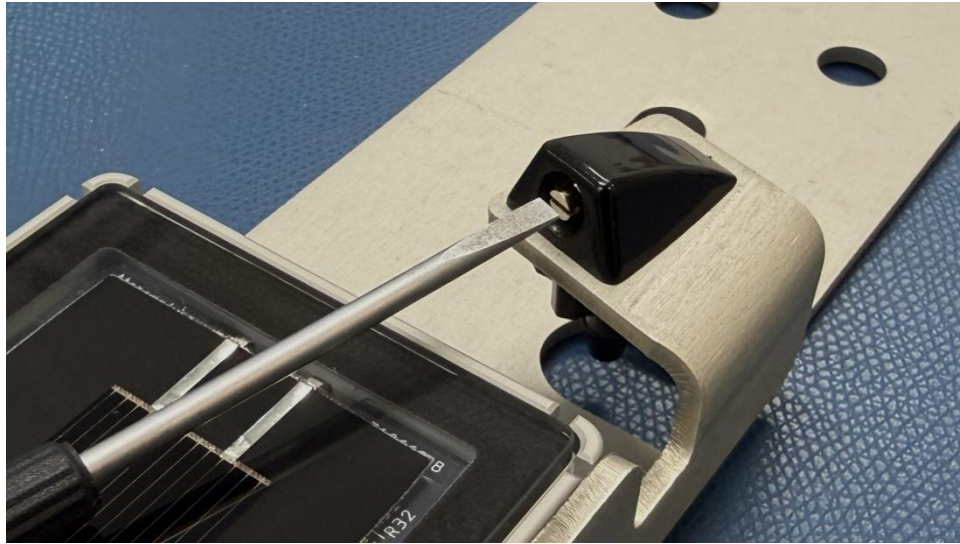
Adjusting nozzle outlet with flathead screwdriver
